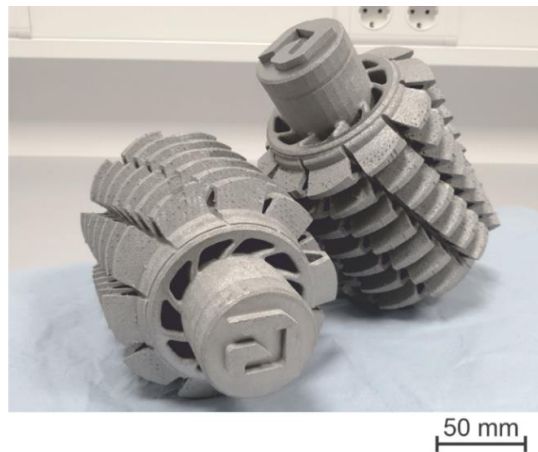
Parts in tool steel M4 built with the EB unit developed in EBMPerform.
